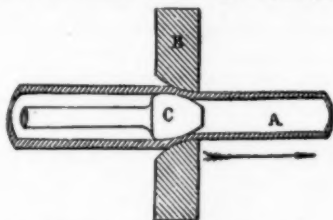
DRAWING OF A LAP-WELDED TUBE.
